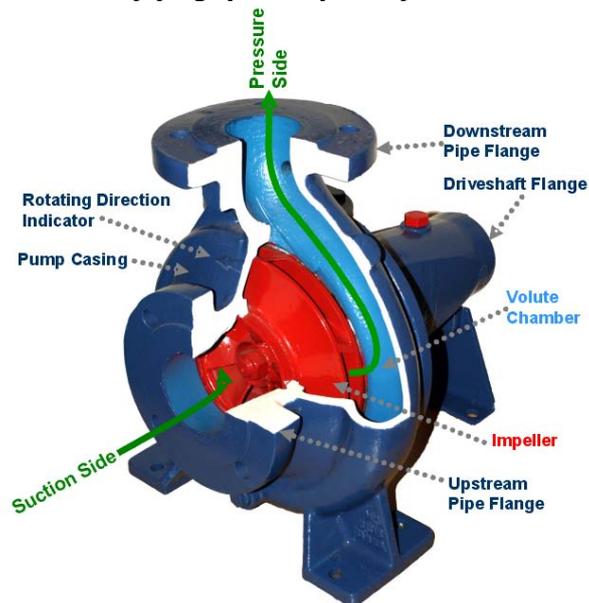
cross-section of a centrifugal pump, cit: Wasserwerk Delmenhorst
